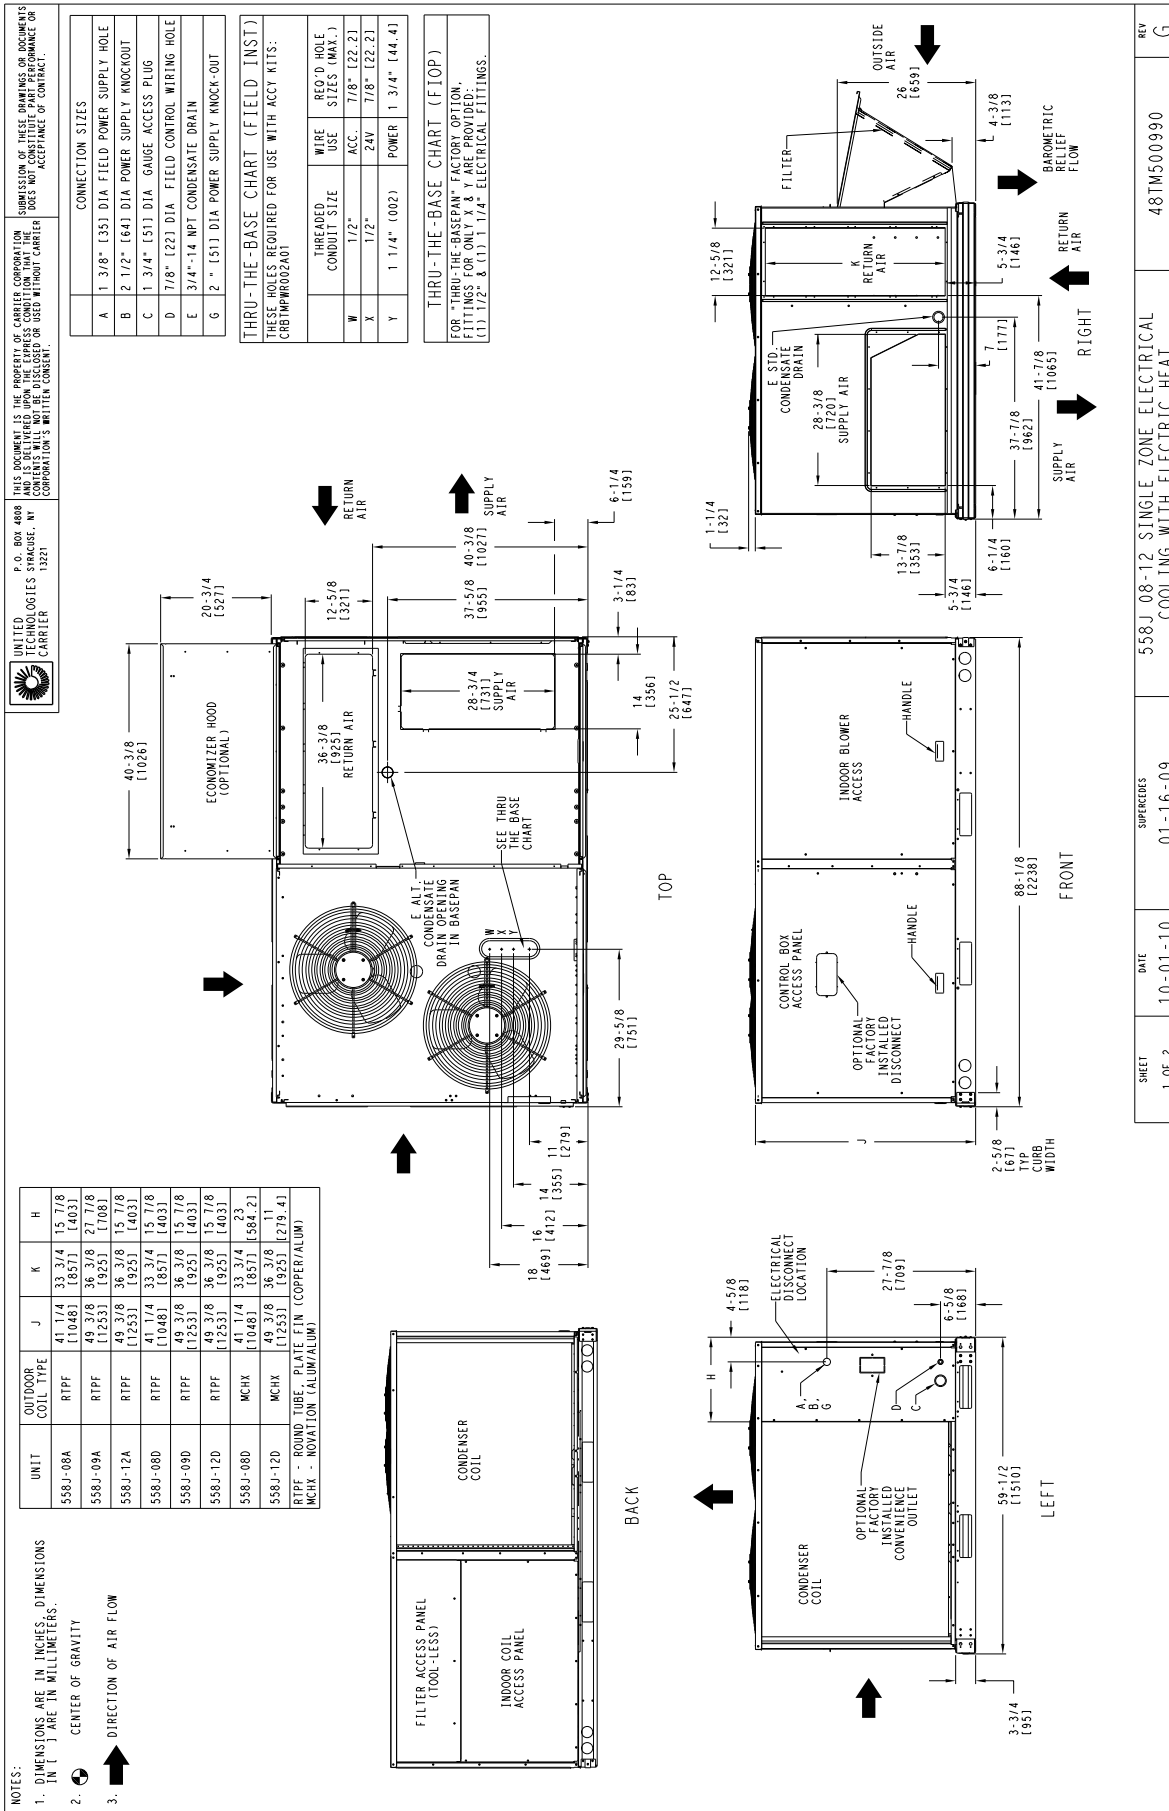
Dimensions 558J 08-12 (Sheet 1 of 2)
